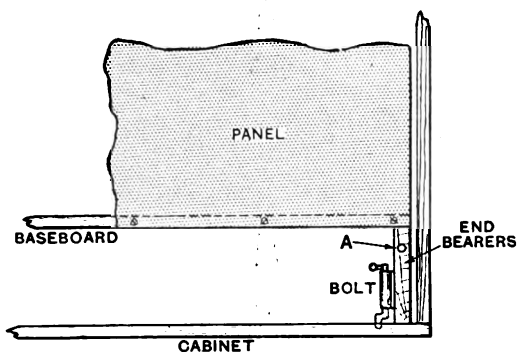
Bolts lock the baseboard in either the working or travelling position. A is the carrying socket for the frame aerial spindle when the set is closed up.
